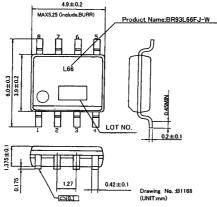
(e) PHYSICAL DIMENSION SOP-J8 (BR93L66FJ-W)
